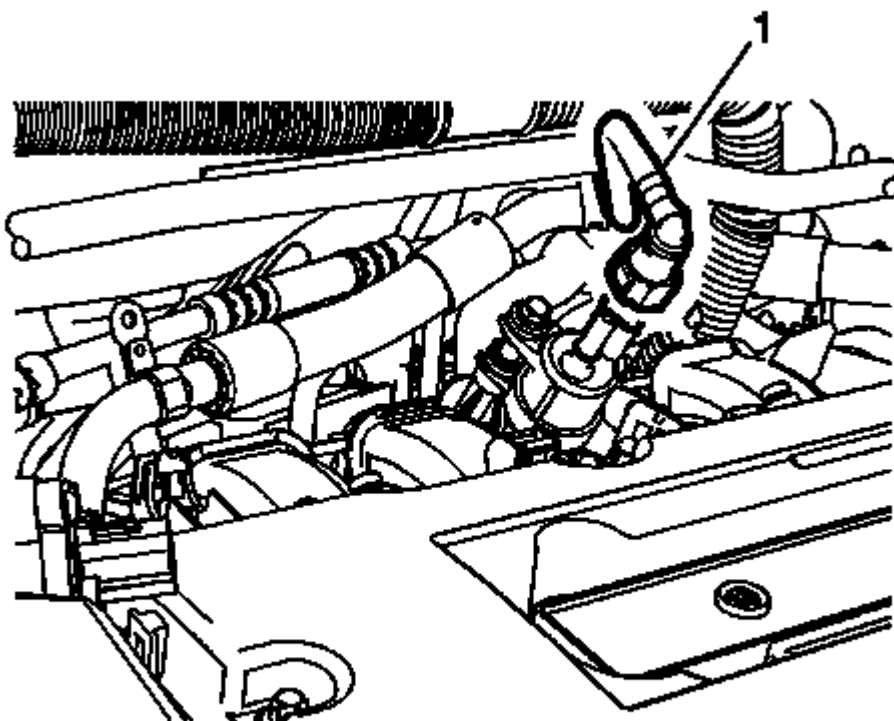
Evaporative Emission Canister Purge Solenoid Valve Hose
